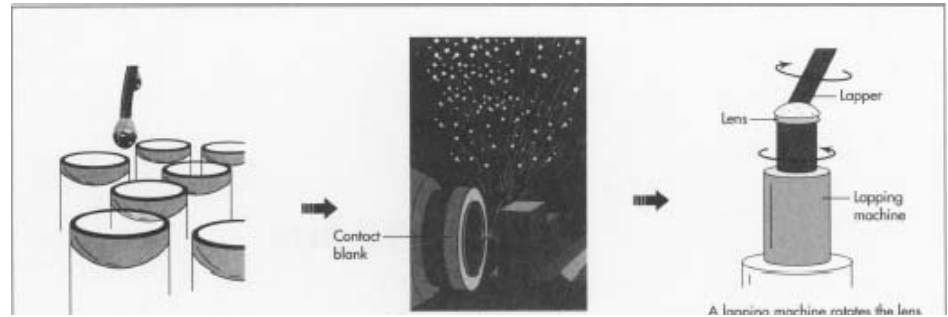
This picture shows some of the methods for making contact lenses, including molding and lathe cut.
